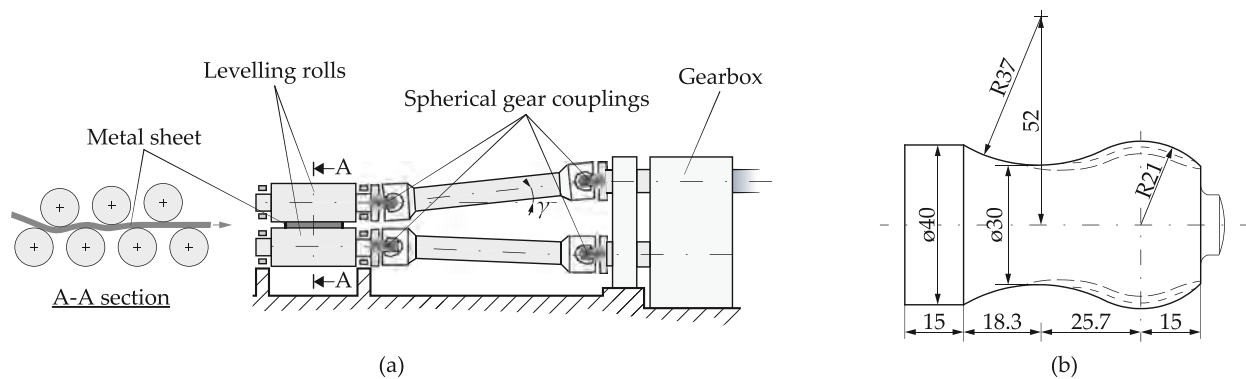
Case study: (a) the roll-leveling machine where this type of gear coupling is employed, and (b) the geometry of the gear coupling.
